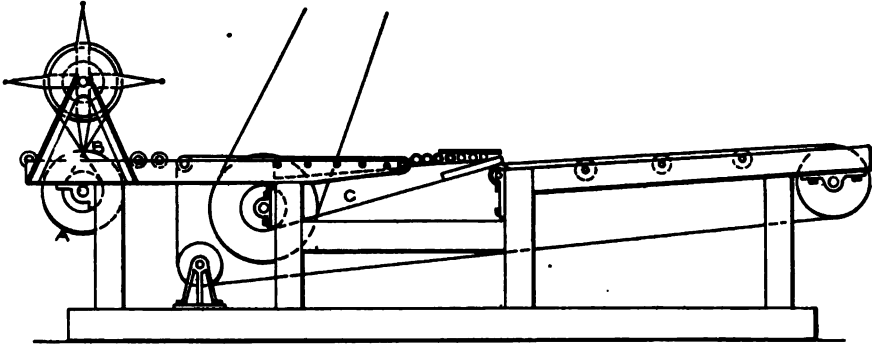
Mueller's Reel Shingle Tile Cutter, sold by the Illinois Construction & Supply Company, St. Louis, Mo.
